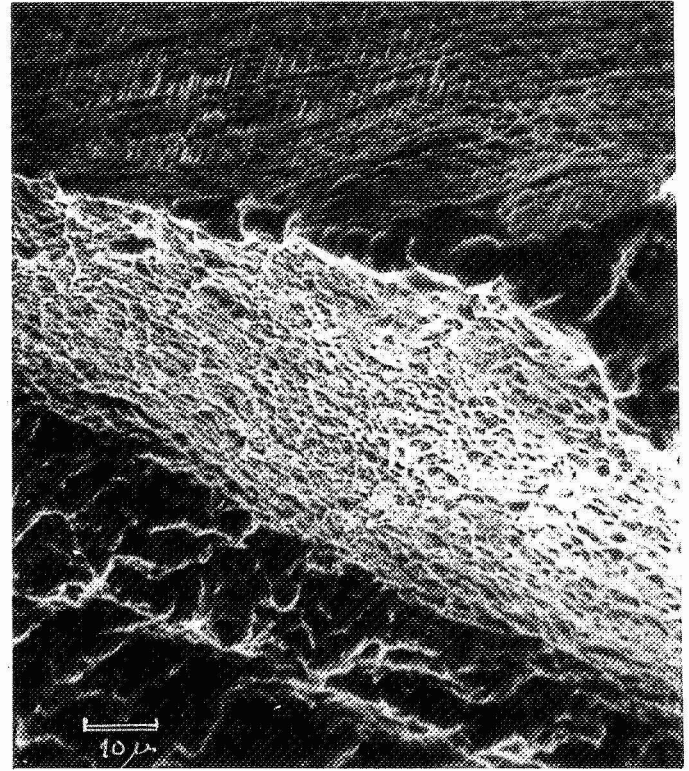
Intersection between fracture surface and specimen surface.
